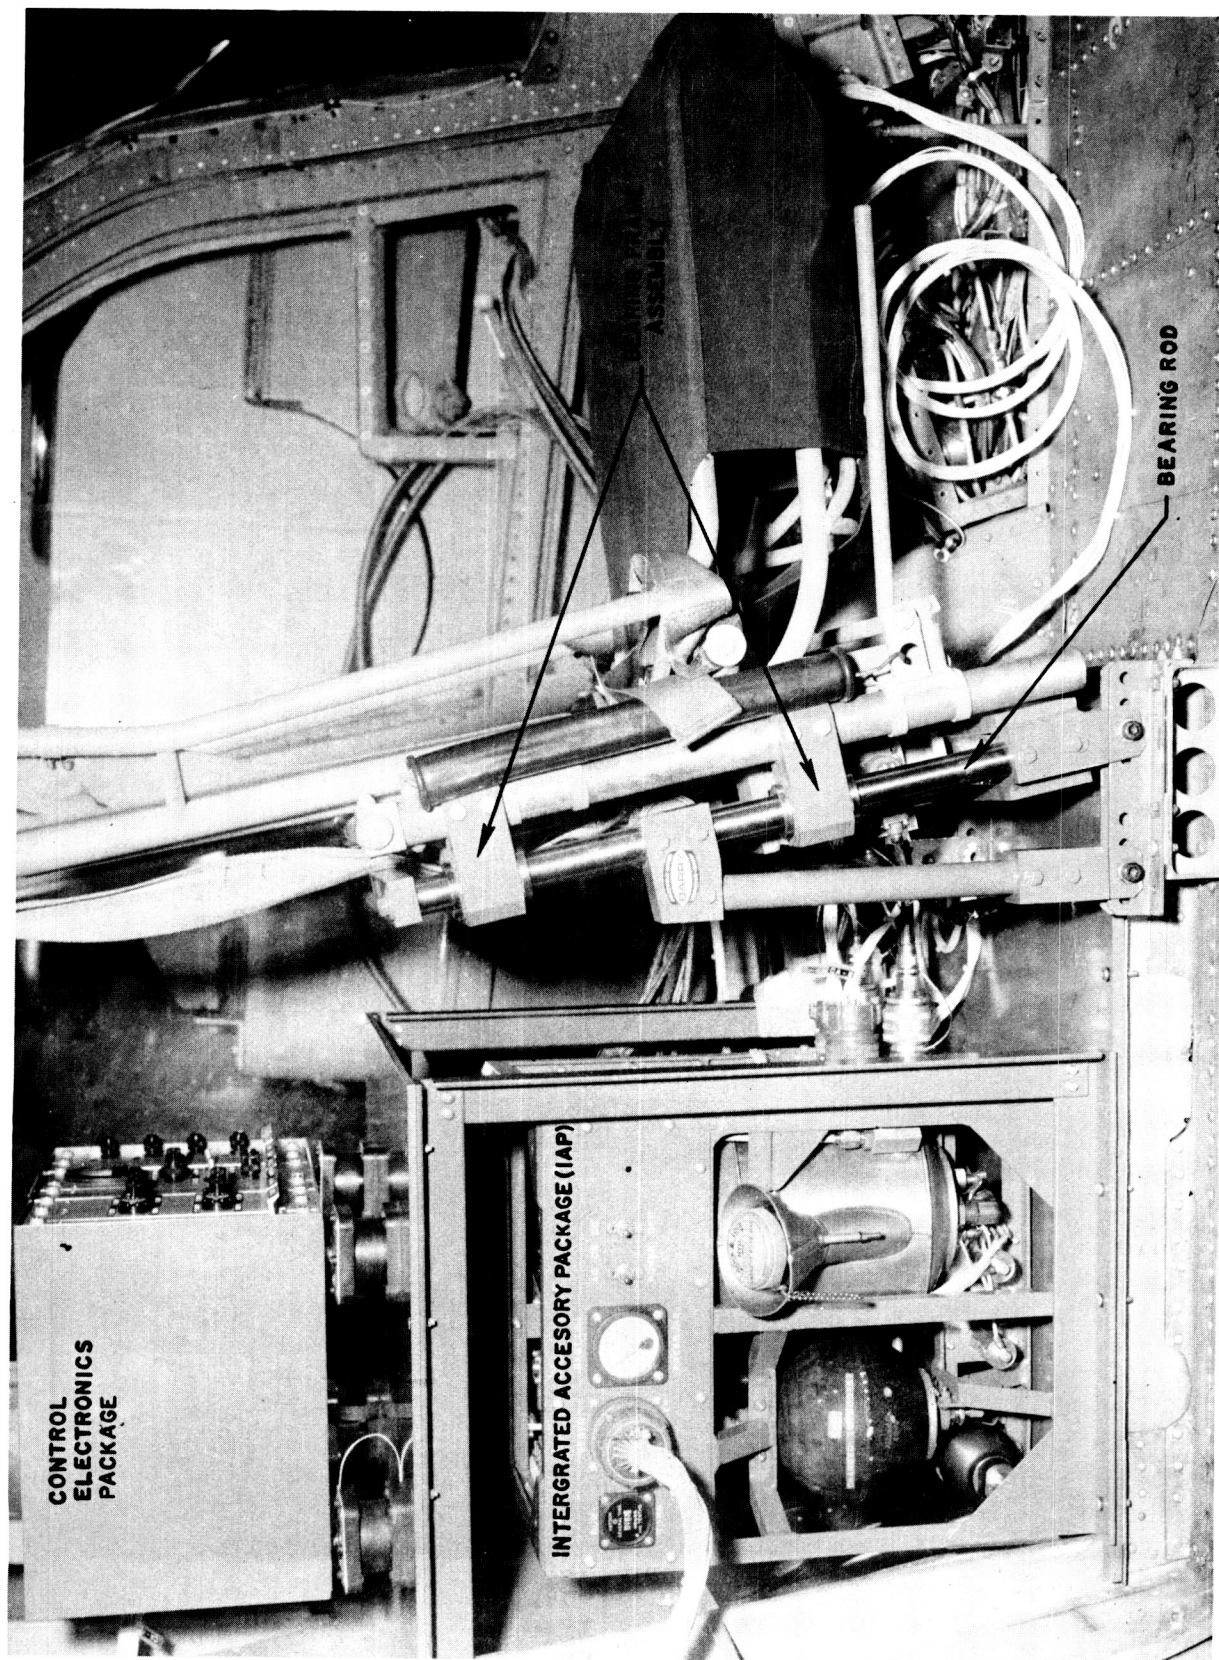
Integrated Accessory Package (IAP), Control Electronics Package and Active Seat Installed on XH-51A Fuselage
